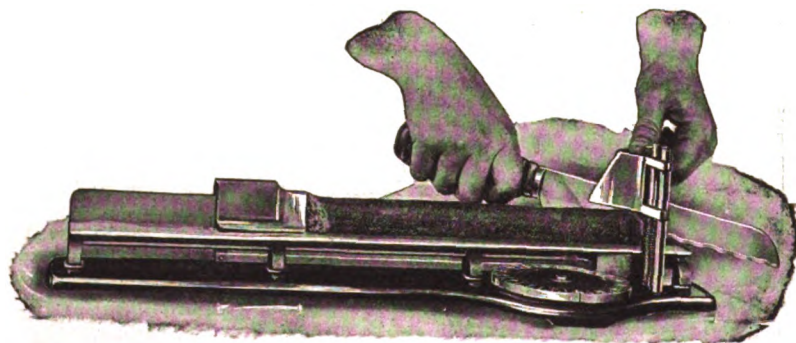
EXACTO PACKING GAUGE AND CUTTER IN OPERATION.
